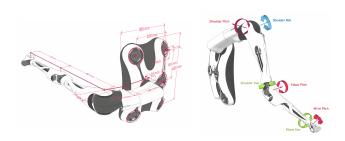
Dimensions (Left) and joint arrangement (Right) of the JIZAI ARMS.
